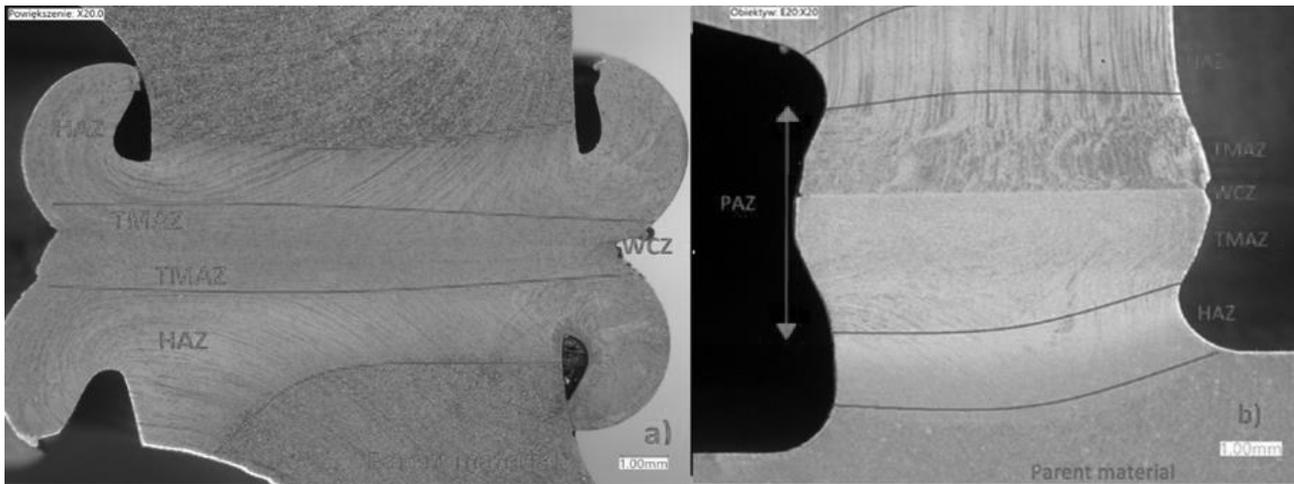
Heat affected zones a) friction butt welding, b) low pressure friction welding
